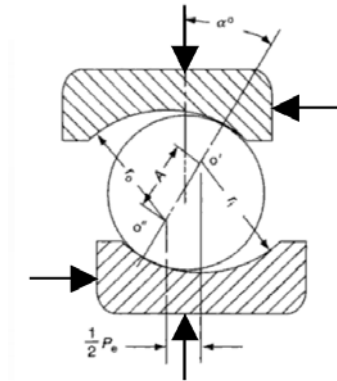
Typical Ball Bearing Load Path (Thrust and Radial Loads)
